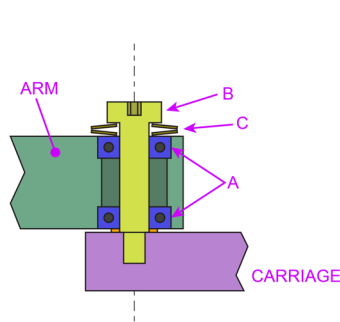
A shoulder joint design that utilizes a pair of radial bearings (A) running on a shoulder screw (B) and preloaded using disc washers (C). This design uses fewer parts but is estimated to be significantly less stiff for the same outer shoulder diameter.
